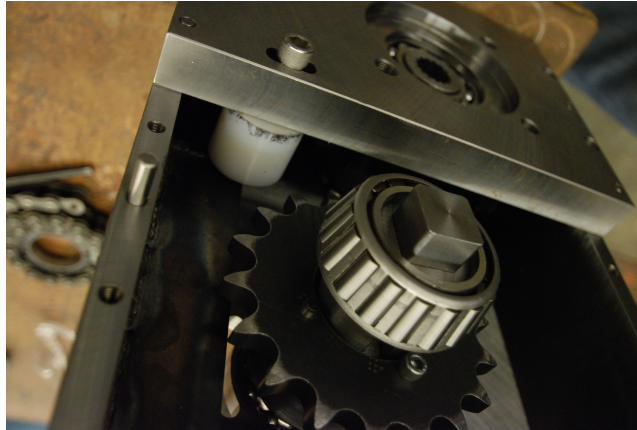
Resolution to clearance issue to remove lower sprocket
